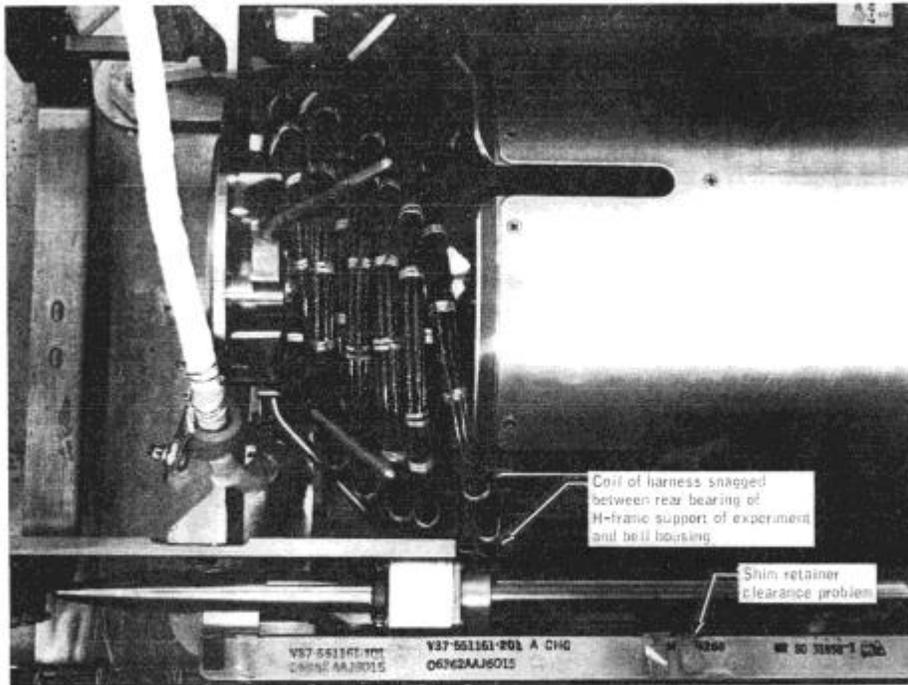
Bottom view of mass spectrometer deployment mechanism (experiment removed).
